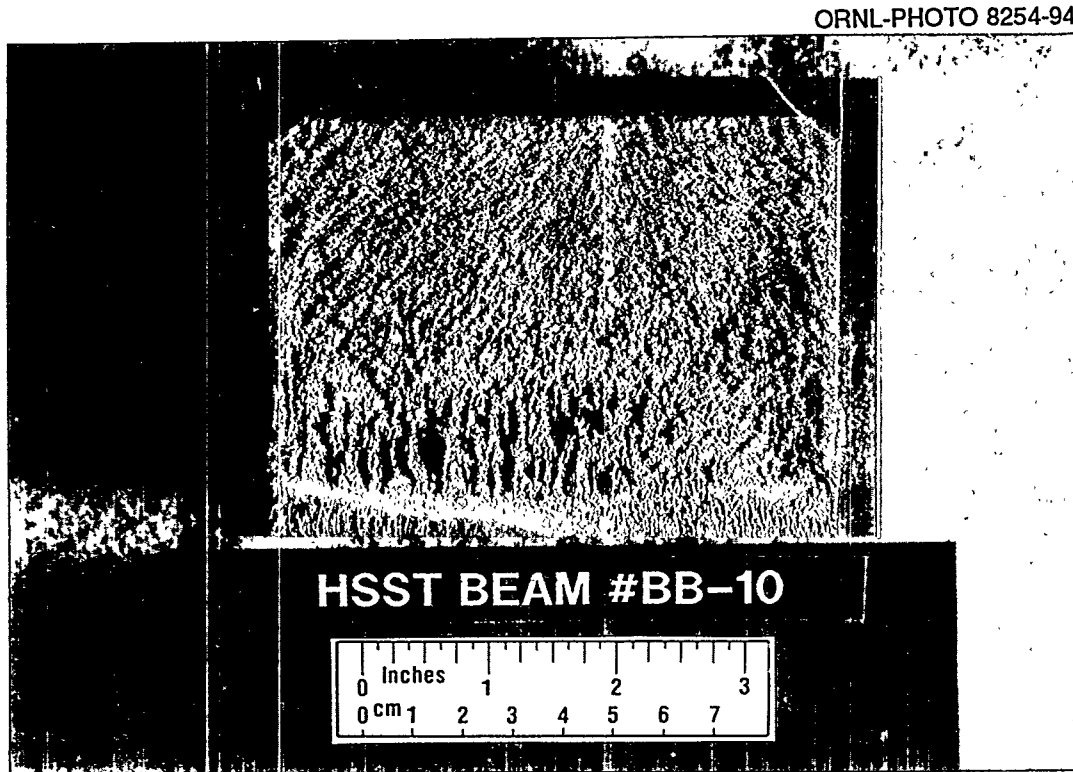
Fracture surface for shallow-flaw cruciform specimen BB-10 with fracture initiation site indicated
